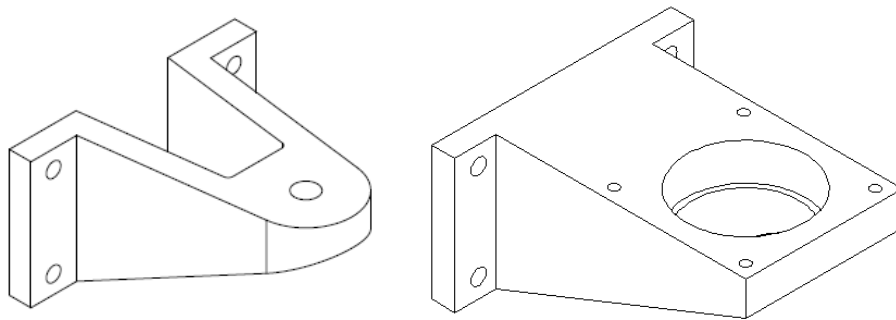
Bearing housing geometries from the alpha design (left) and final design (right)
